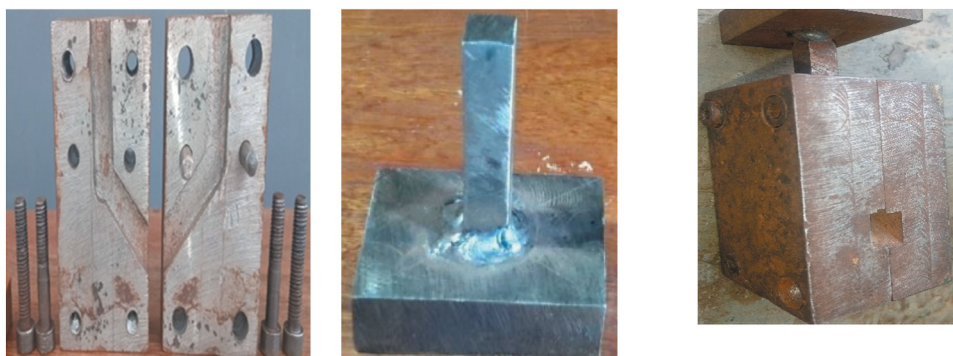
ECAE components (a) die (b) Punch. The assembly for the die is shown in (c).
